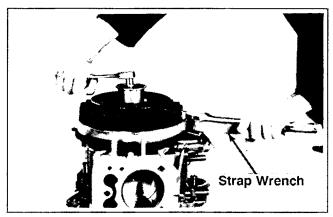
Removing Flywheel Retaining Screw And Drive Cup.
